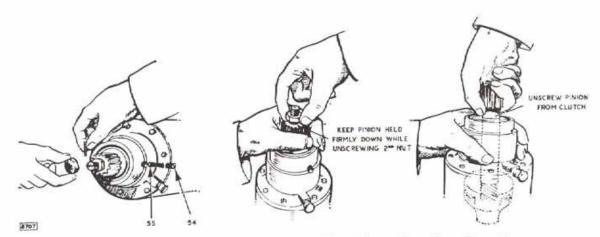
Method of changing starter motor driving pinion without dismantling unit.
